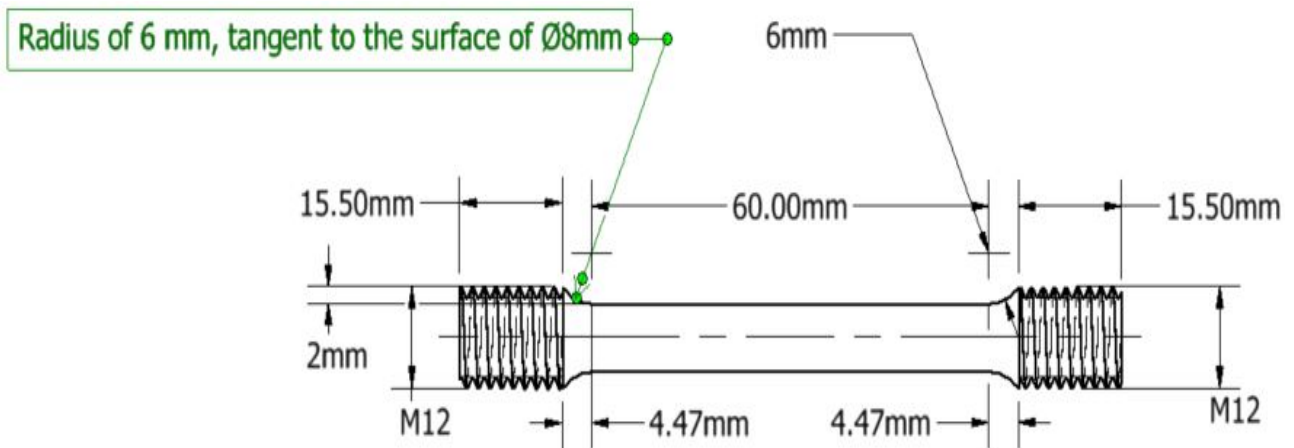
Auto-cad Inventor drawing of the tensile specimen bar.
